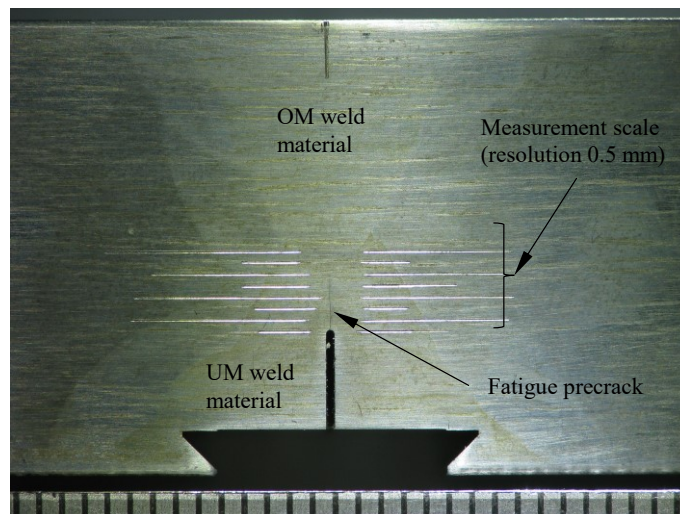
The view of the etched side surface of the SE(B) specimen. The OM-UM welded joint with fatigue precrack in the UM weld material is clearly visible. The measurement scale with resolution of 0.5 mm was marked on the side surface in order to monitor fatigue precrack length during precracking procedure.
